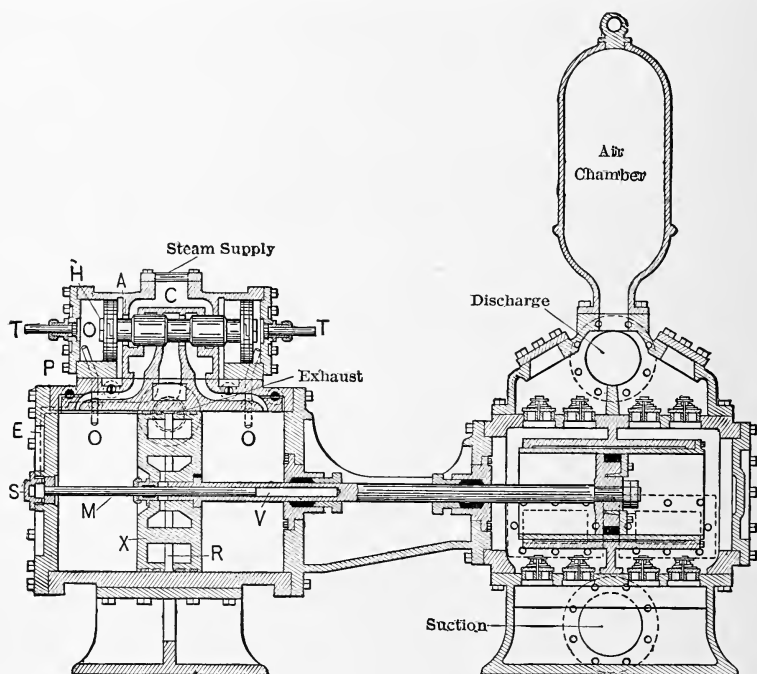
Marsh Boiler-feed Pump. A Typical Steam-actuated Valve Gear.
